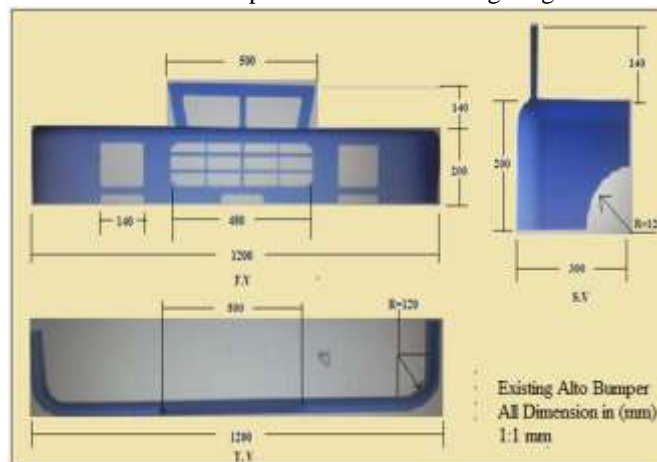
Existing Maruti Suzuki Alto bumper drawing sheet
